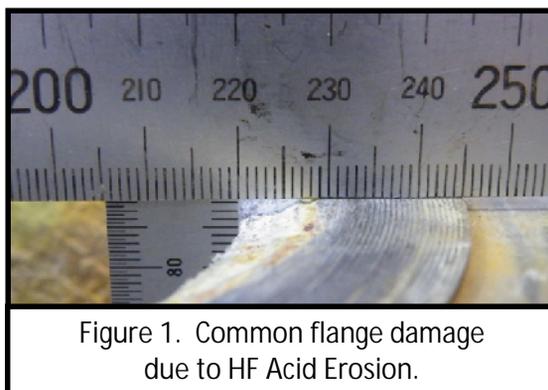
Common flange damage due to HF Acid Erosion.
